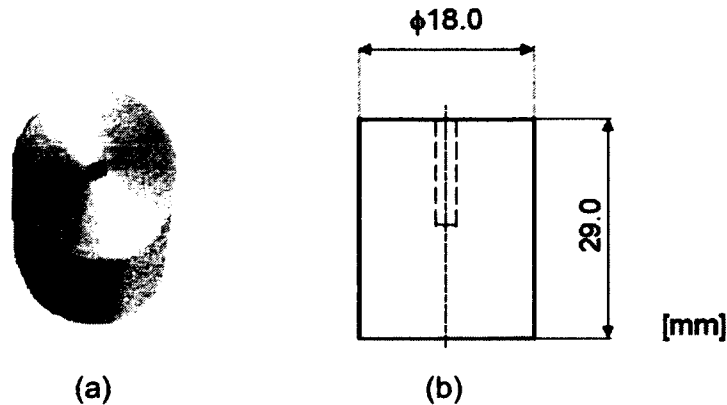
(a) Overall view of the corrosion test sample, (b) profile drawing of the corrosion test sample.
